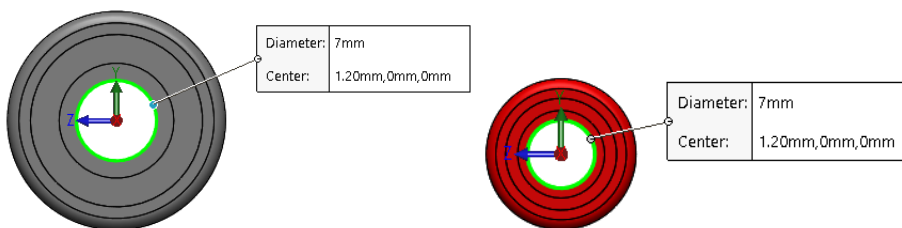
Cabinet wheels (dark grey) and drawer wheels (red) with an inner diameter of 7 mm.
